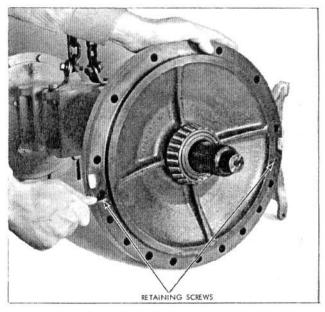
Carrier Plate Retaining Screw Removal or Installation
